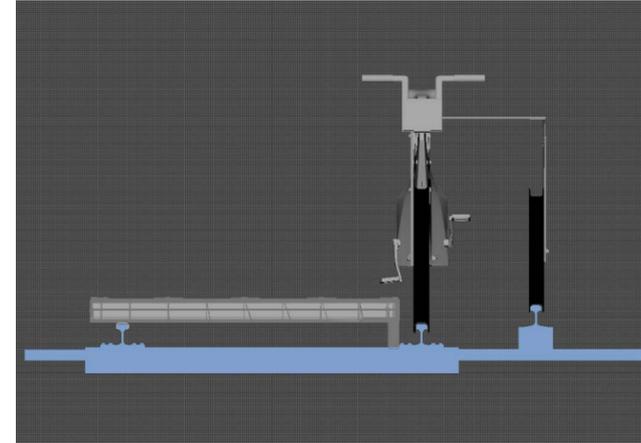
Technical drawing of the platform and the rail bicycle- front view
